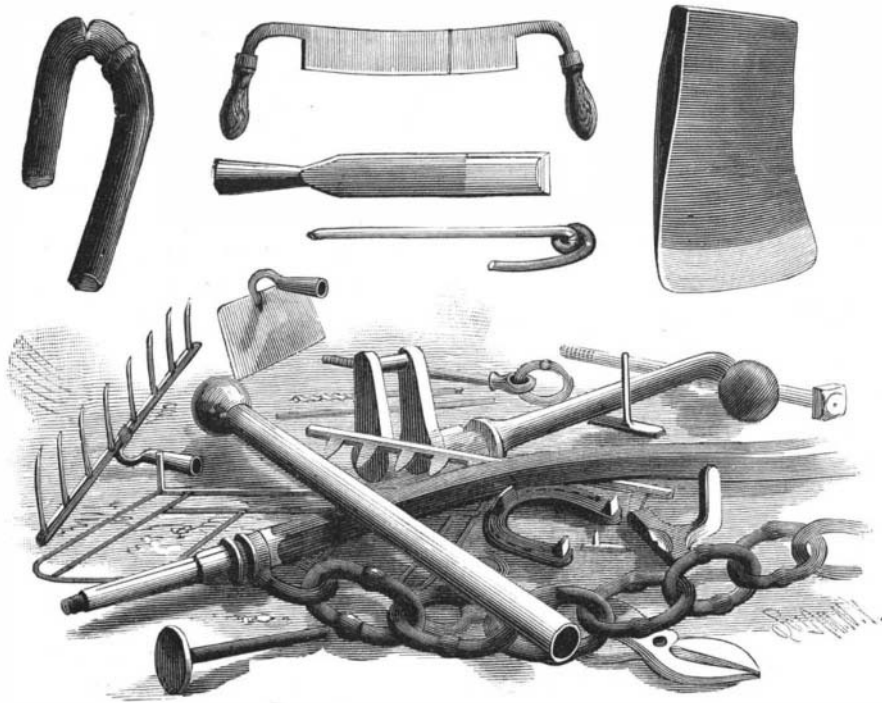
EXAMPLES OF ELECTRIC WELDING.
